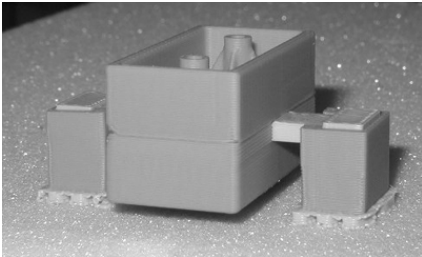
The test part inside the FDM machine after the entire build is completed.
